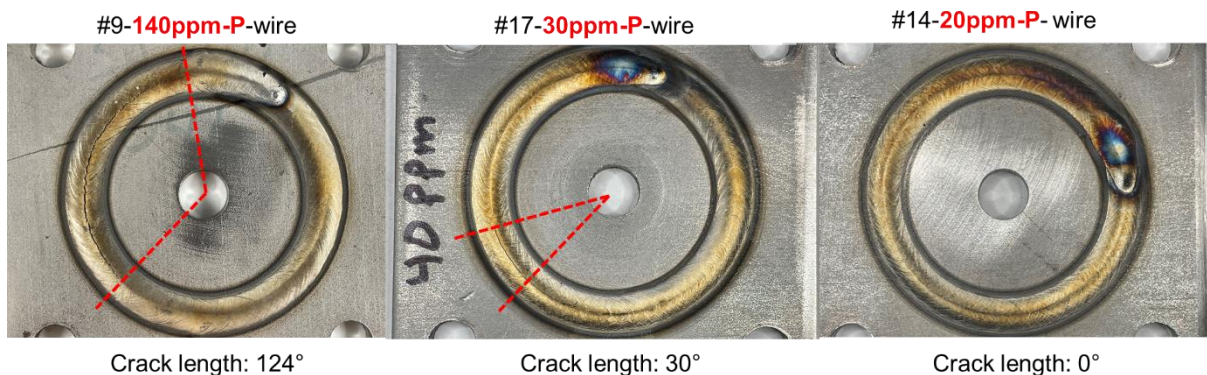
Top view of the centerline solidification cracking on 304 steel plates with three 709 weld wires (<20 wppm-P, 30 wppm-P, 140 wppm-P).
